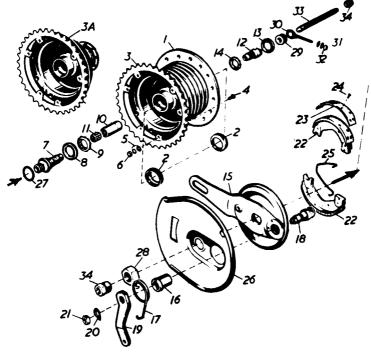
REAR HUB ASSEMBLY (MODELS SUBSEQUENT TO 482 755/522 990)
